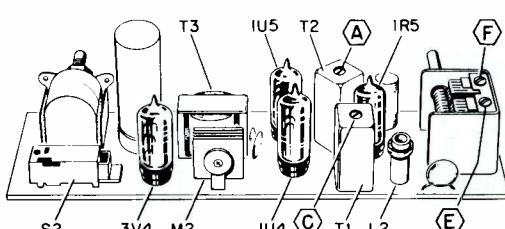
Top View of Chassis 4W2. Tube Locations and Alignment Points Shown.
